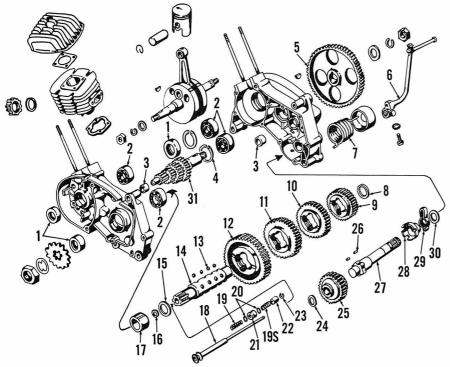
Exploded view of the crankcase and four speed transmission assembly. Refer to Fig. HK11 for five speed transmission.
